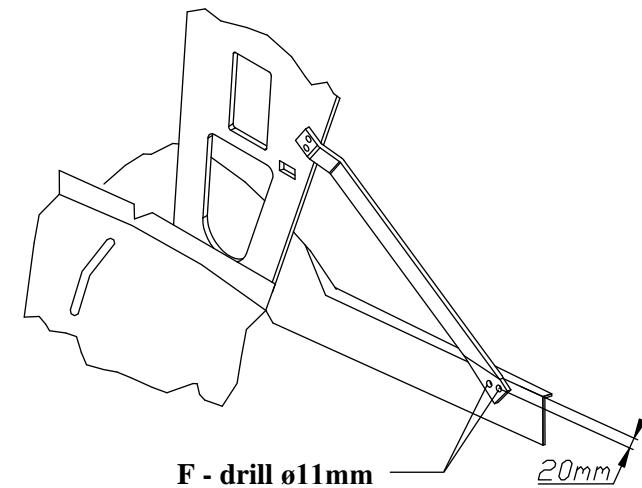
Through holes F in reinforcement drill $\varnothing 11\text{mm}$, 20mm below edge of bodywork.
